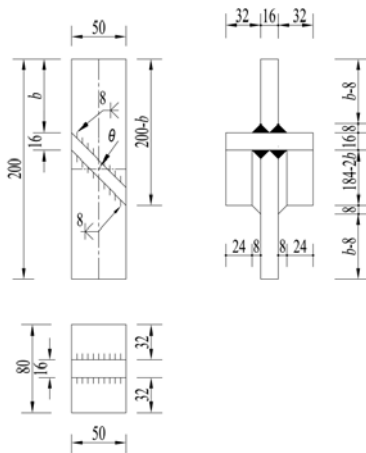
Geometric Configurations of the Cruciform Welded joints
